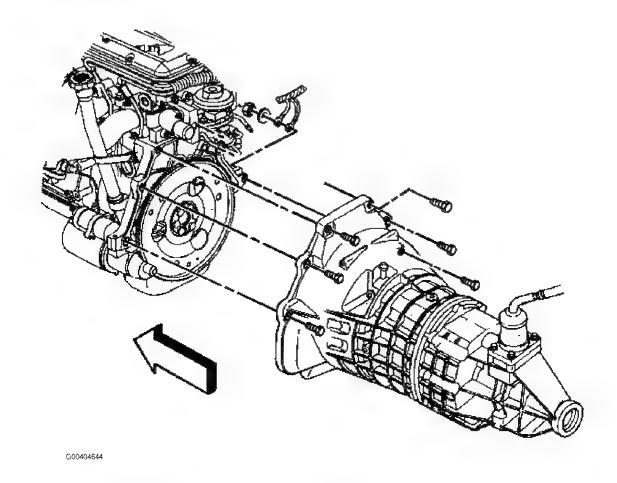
Removing/Installing Transmission Courtesy of GENERAL MOTORS CORP.
